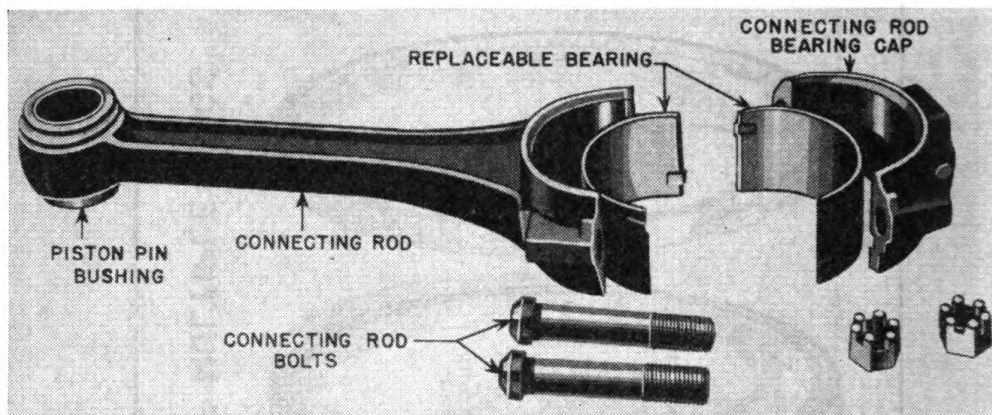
Connecting-rod assembly, showing interchangeable crank-pin bearing.
